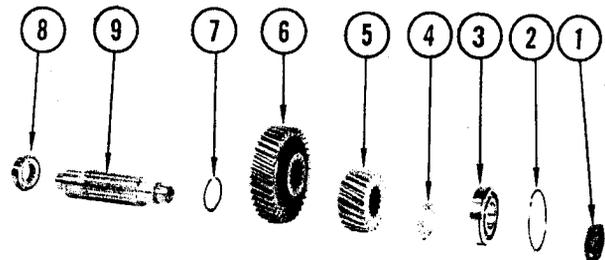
EXPLODED VIEW OF LOWER CREEPER GEAR ASSEMBLY
